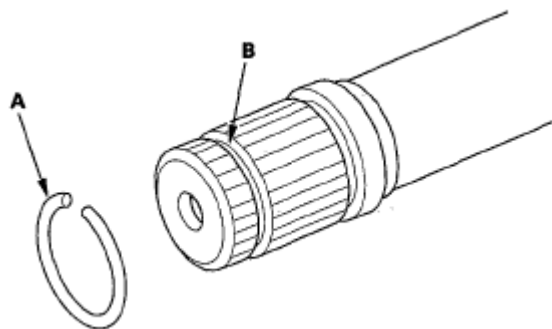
Identifying Stop Ring In Driveshaft Groove
